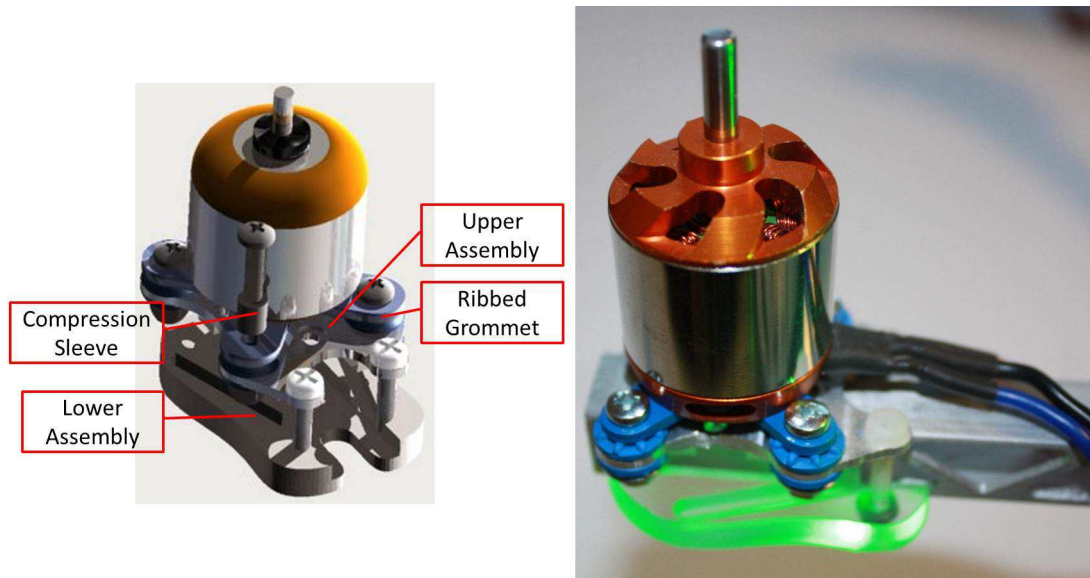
LEFT: CAD rendering of the motor mount assembly. RIGHT: Motor mount assembly affixed to a single arm of the HexaCopter with status LED indicator lit.
